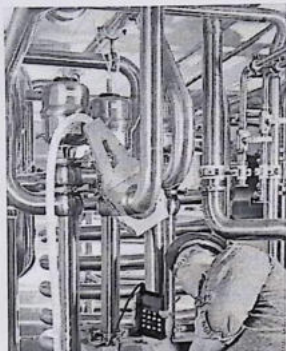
Stainless steel sanitary tubing joints should be made by automatic orbital welding where possible (Kupitzis et al., 2006).
